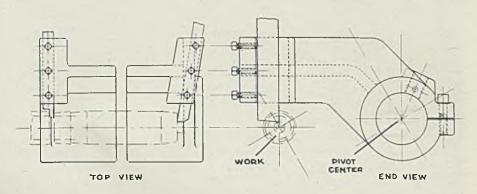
Diagrams of the rocking tool holders and their mounting as set up for facing and cutting-off operations on ends of the shell. View at left is looking down from in front of the machine. At right is an end view from the tailstock end showing how these holders are clamped and locked to the camactuated oscillating rod which swings them to and from the work
